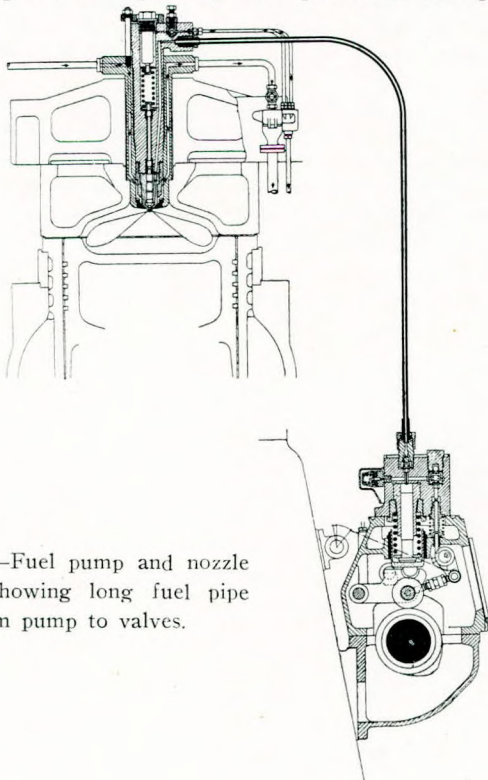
Fuel pump and nozzle valve showing long fuel pipe from pump to valves.
